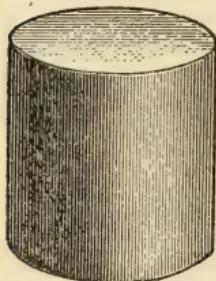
Form of Lead Plug used in Pressure Gauge, Full Size.
